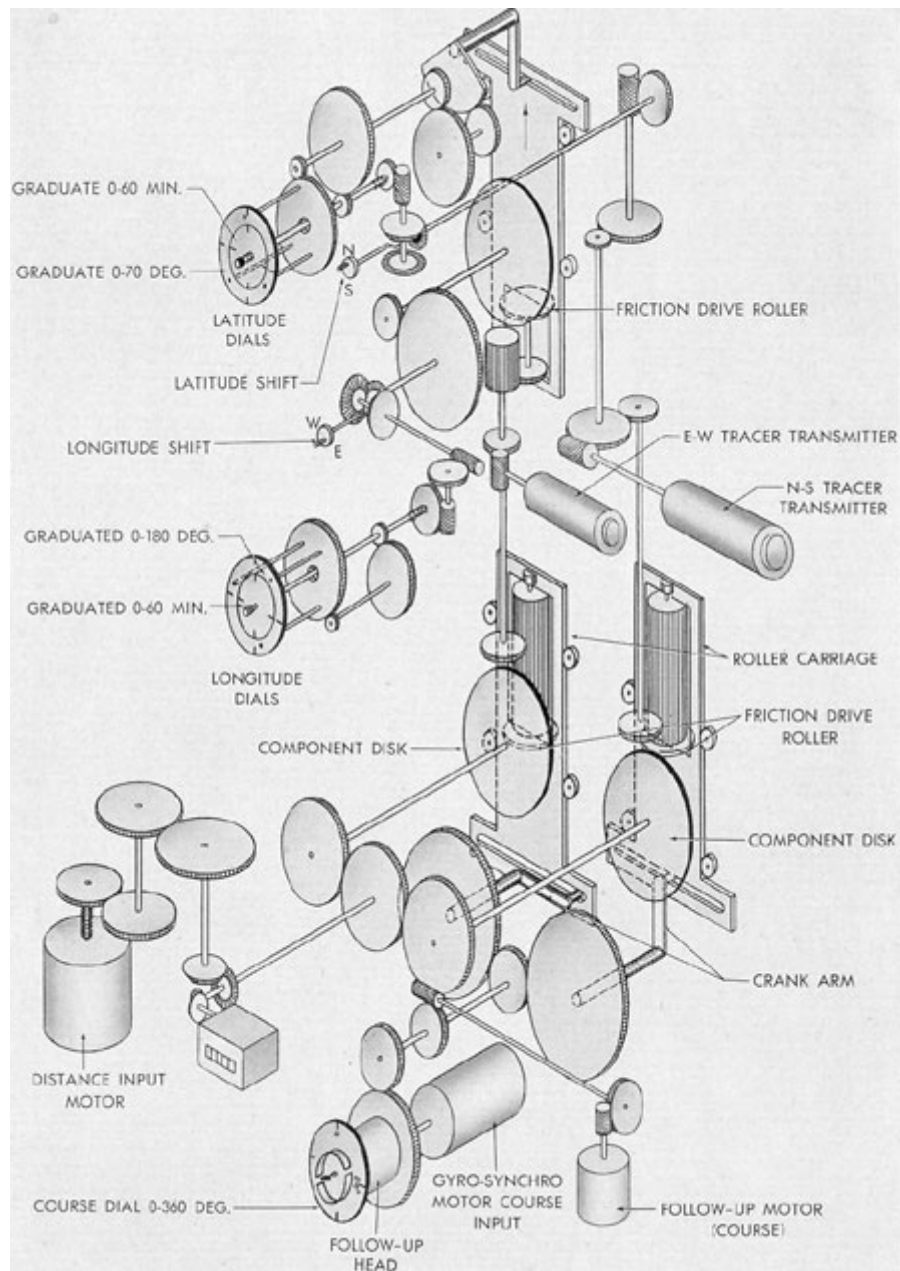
Dead reckoning analyzer Indicator gear diagram.
